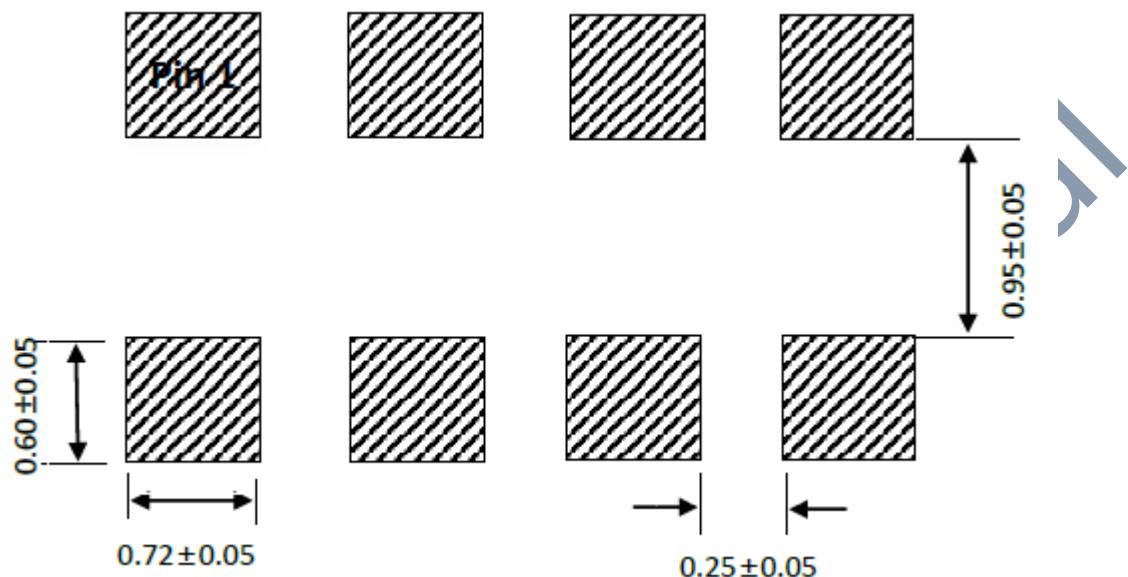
PCB layout design guide for EM30918 (all linear dimensions are in mm)
